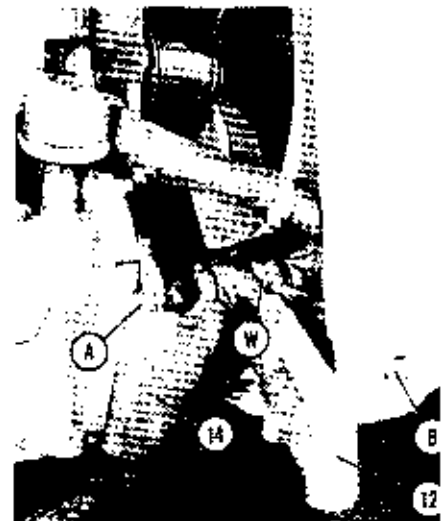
View showing axle center member (12) and front support (14) with R. H. axle extension and front wheel assembly removed. Washers (W) are no longer used and may be discarded when servicing front support. Four stud nuts (A) retain front support to engine. Cap screws (B) attach front end of hood to front support.
